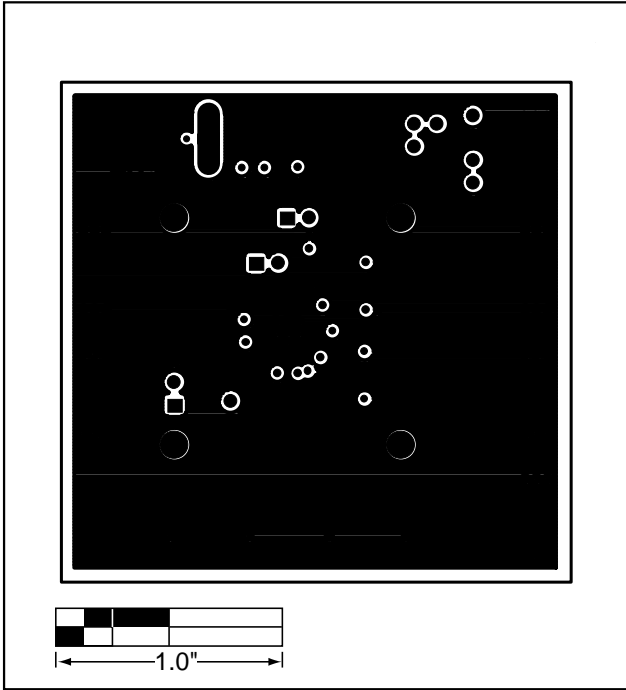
MAX3875 EV Kit PC Board Layout—Ground Plane
